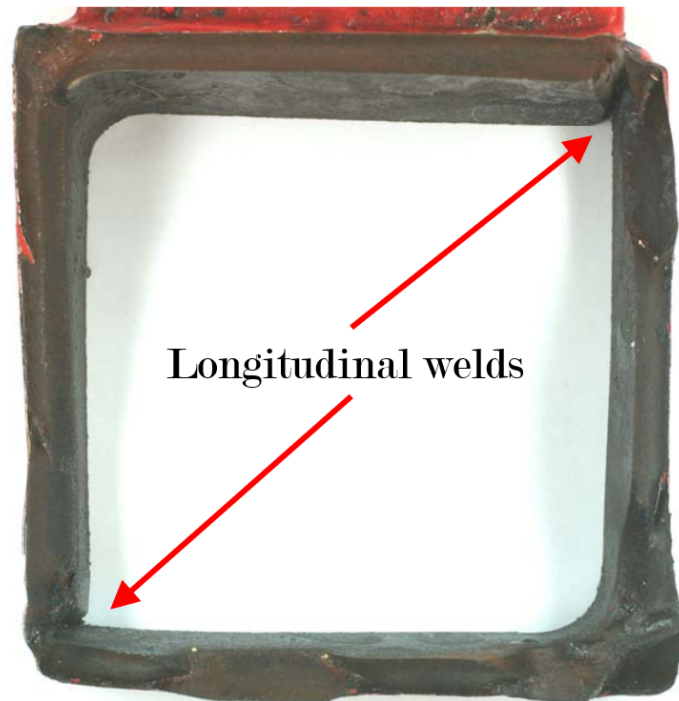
Cross section of welded box section, as used in crane structure ([2])
